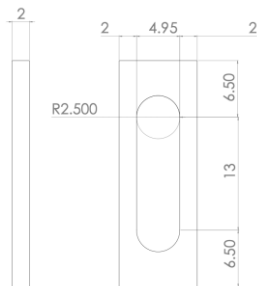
Specimen dimensions for S2BT samples used. All dimensions are in mm.
